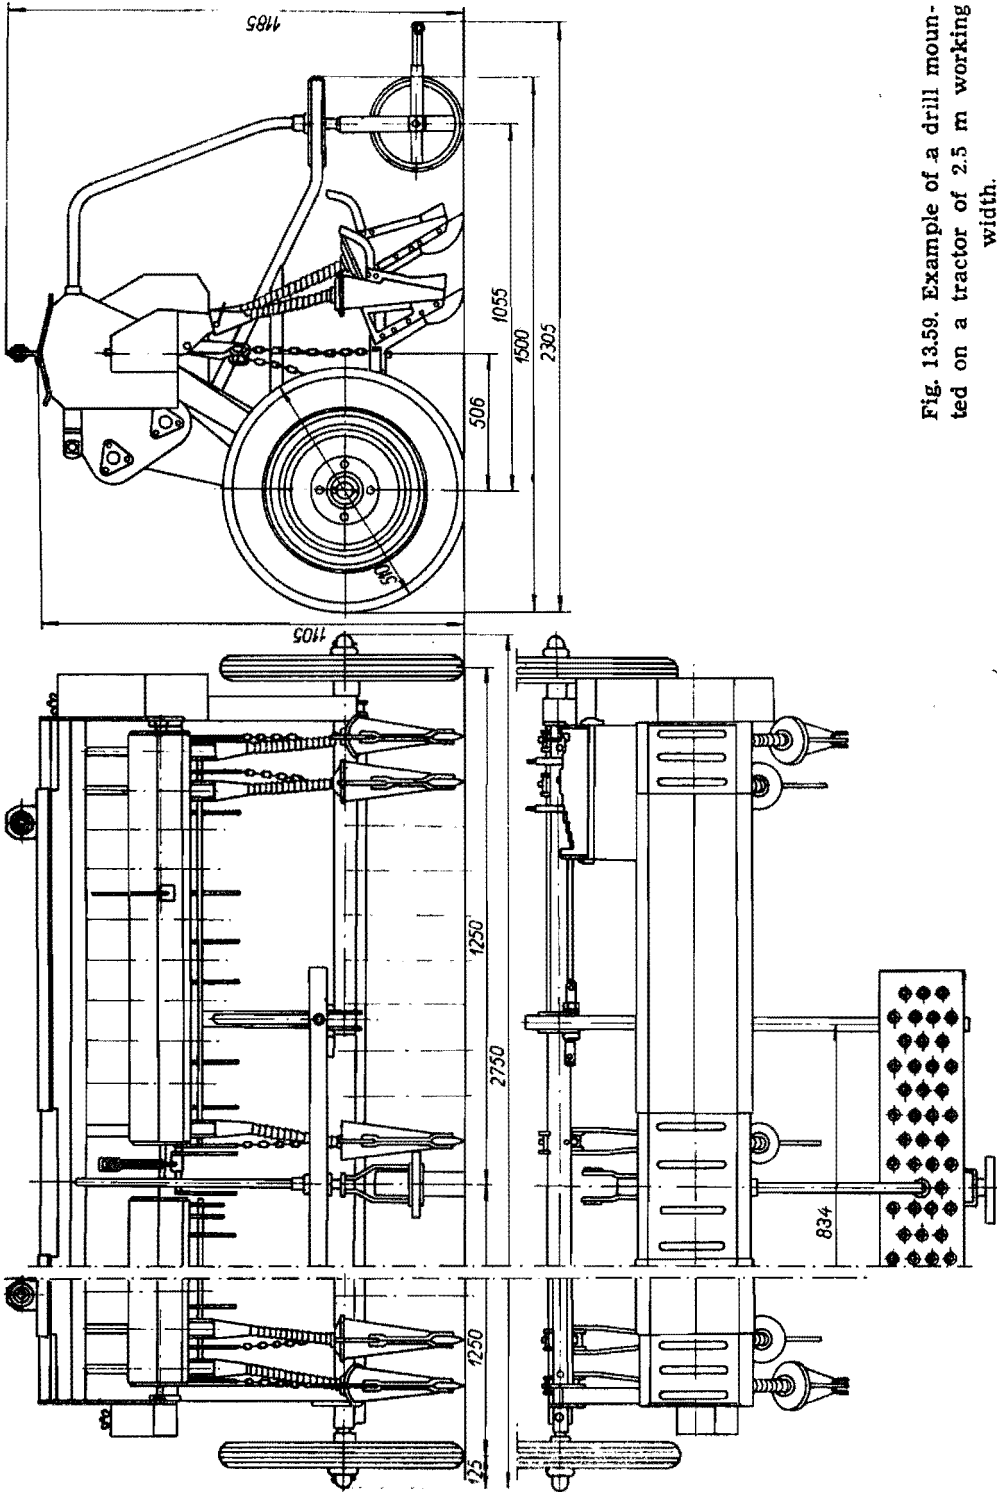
Example of a drill mounted on a tractor of 2.5 m working width.
